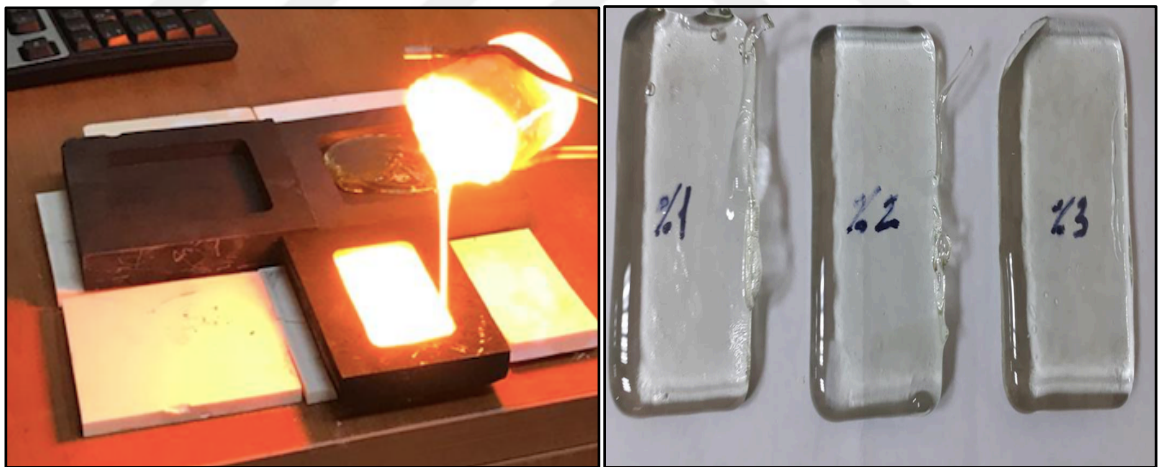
Casting of melted glass to graphite mold and produced glass samples
